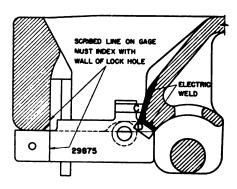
Rear wall of the lock hole and secondary anti-creep shoulder corrected by electric welding to meet requirements of gage No. 29875
